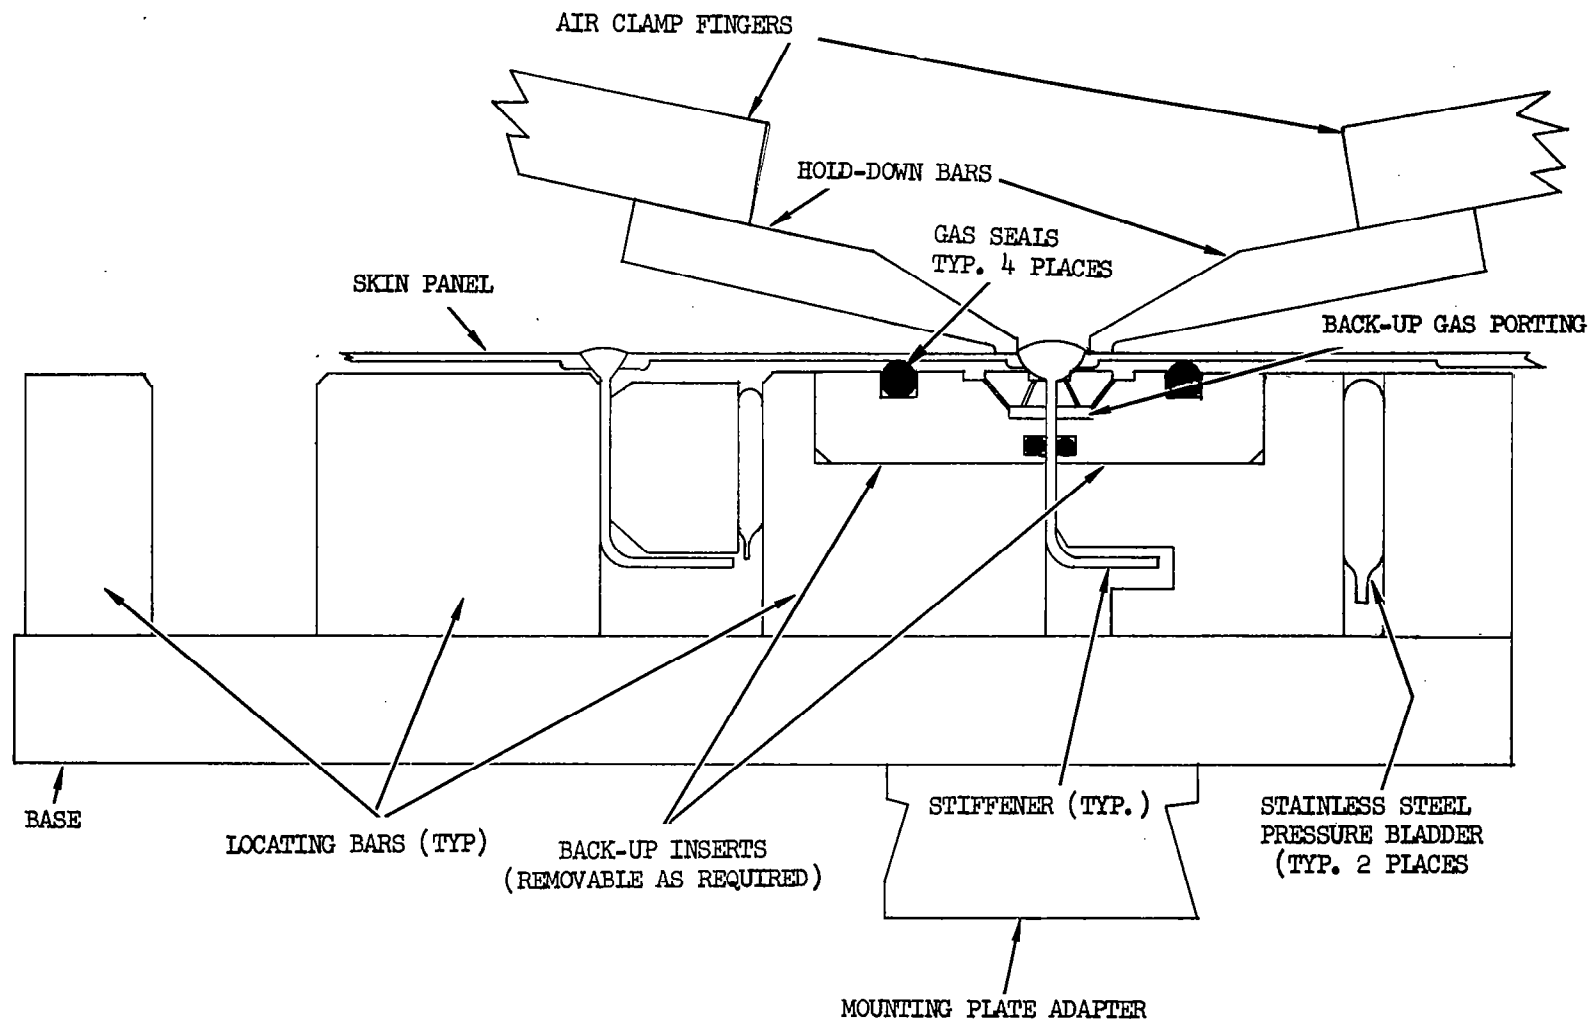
Schematic Drawing of the Stiffener to Skin Fusion Welding Tool
